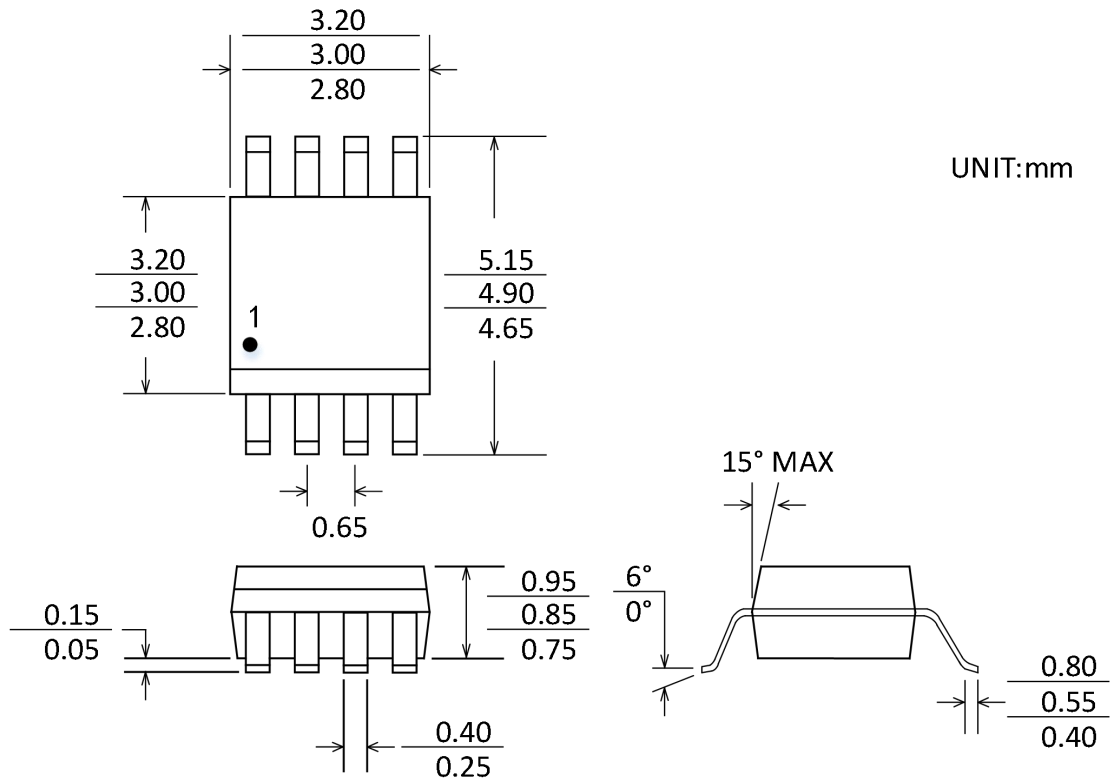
8-Lead Mini Small Outline Package [MSOP]
